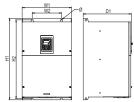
Wall mounting of 3PH 400V 90 – 110kW inverters (Dimension (unit: mm))
